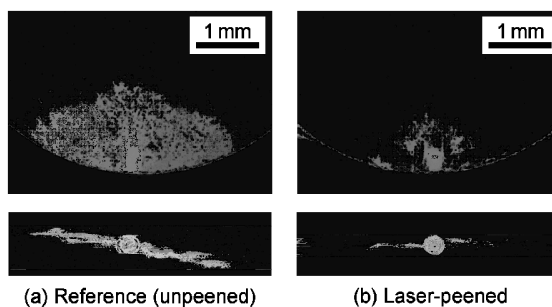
3D image of fatigue crack in AC4CH samples<sup>22)</sup>.
